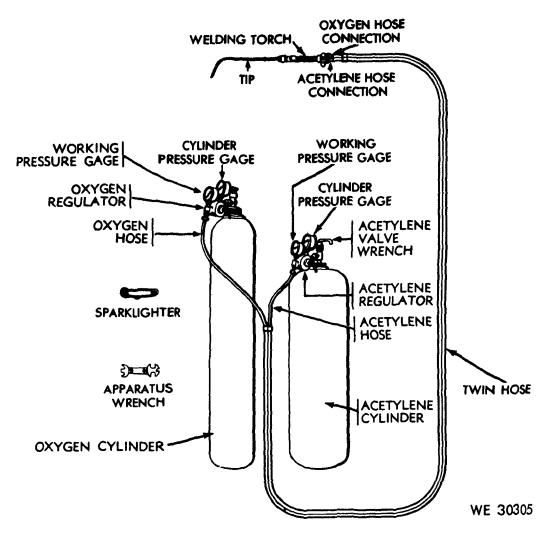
Portable oxy-acetylene welding and cutting equipment.
